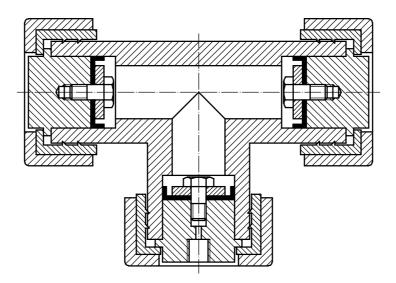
Example of pressure-tight test piece with mechanical compression joints and hydrostatic end thrust
